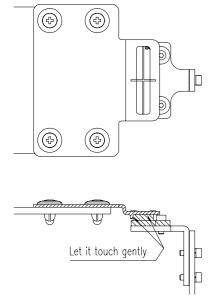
Alignment between the Alignment Template and the Linear Magnet
